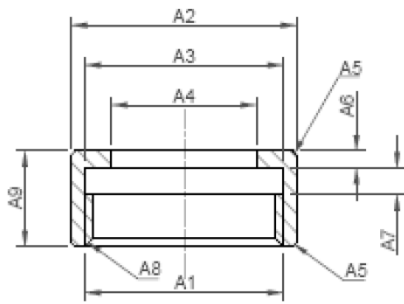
Type H.16 — External threaded 21,8 × 1,814 LH 55° flat seal connection
